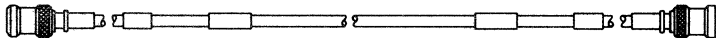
Internal 8-Bit Cable Assembly 2818819
